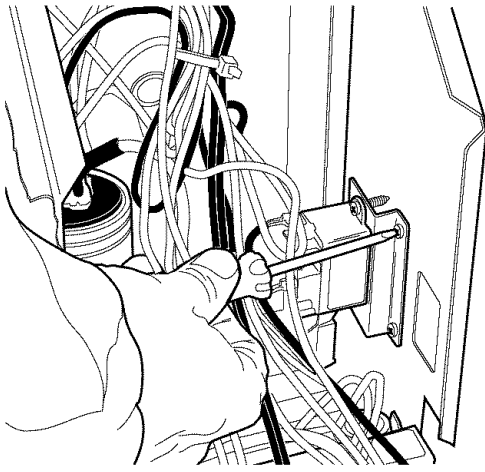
Mount Relay Assembly on the Right Side of the Control Box
